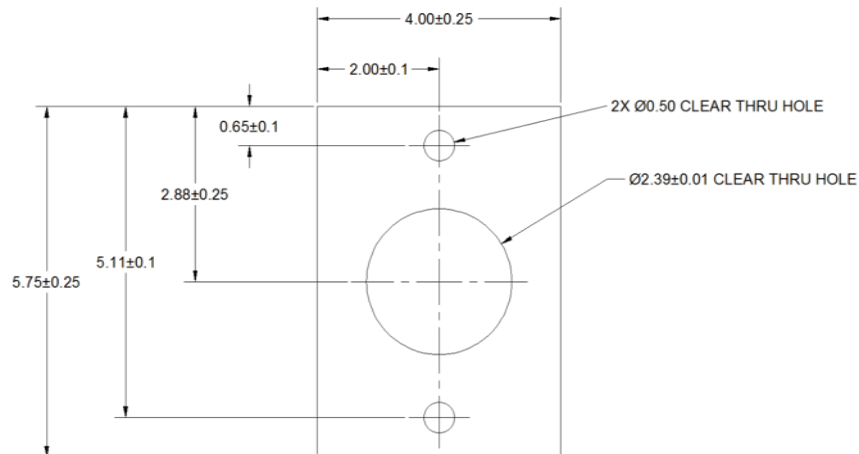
Intercooler Adaptor Dimensions (in Inches)
